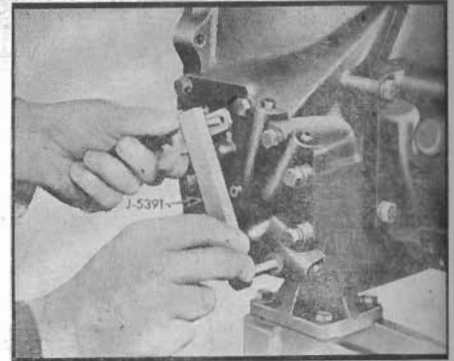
Adjusting throttle valve linkage and outer lever. 1953-59
